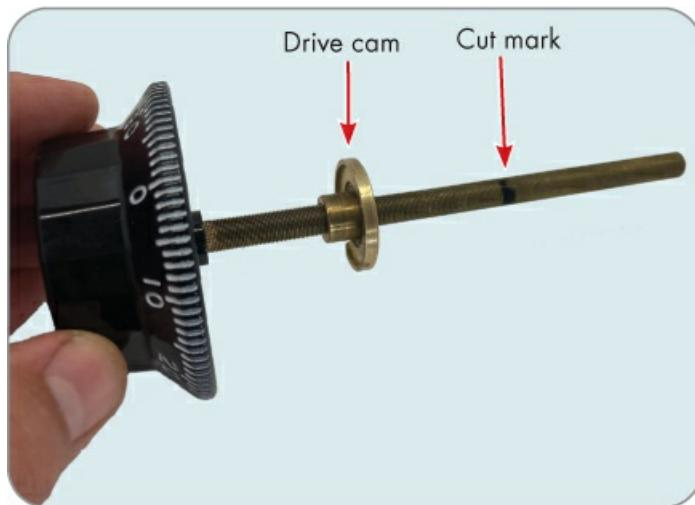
Before cutting your spindle, screw the drive cam back down below your cut mark.
